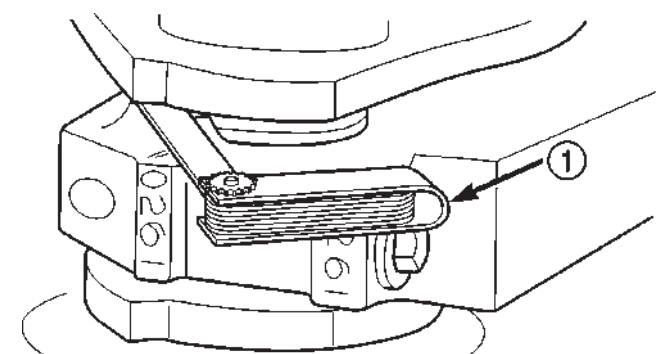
Side Clearance between Connecting Rod/Crankshaft
